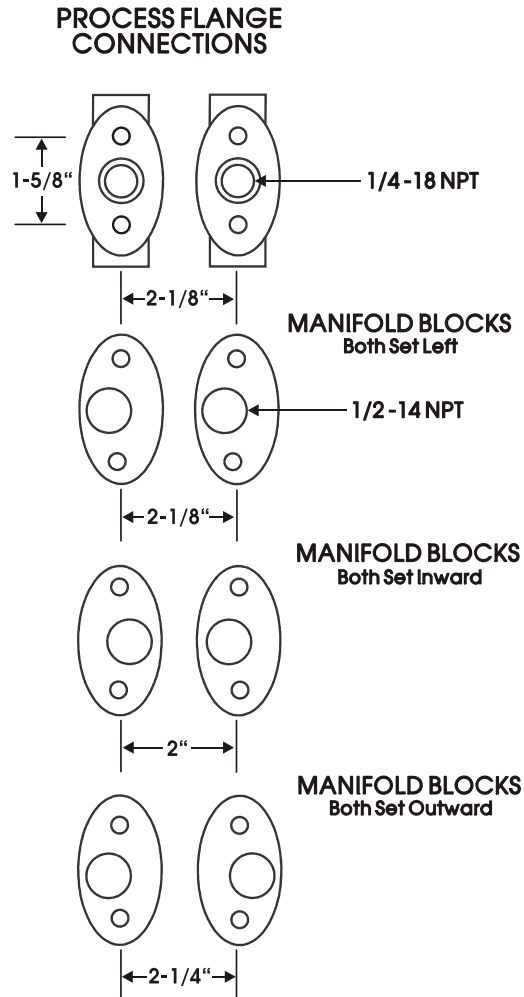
Process Flange and Optional Manifold Block Connectors
